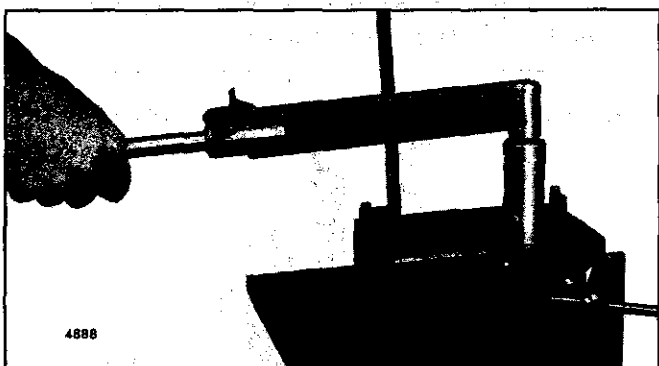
Tightening Injector Nut with Torque Wrench Using Tool J 4983-01
